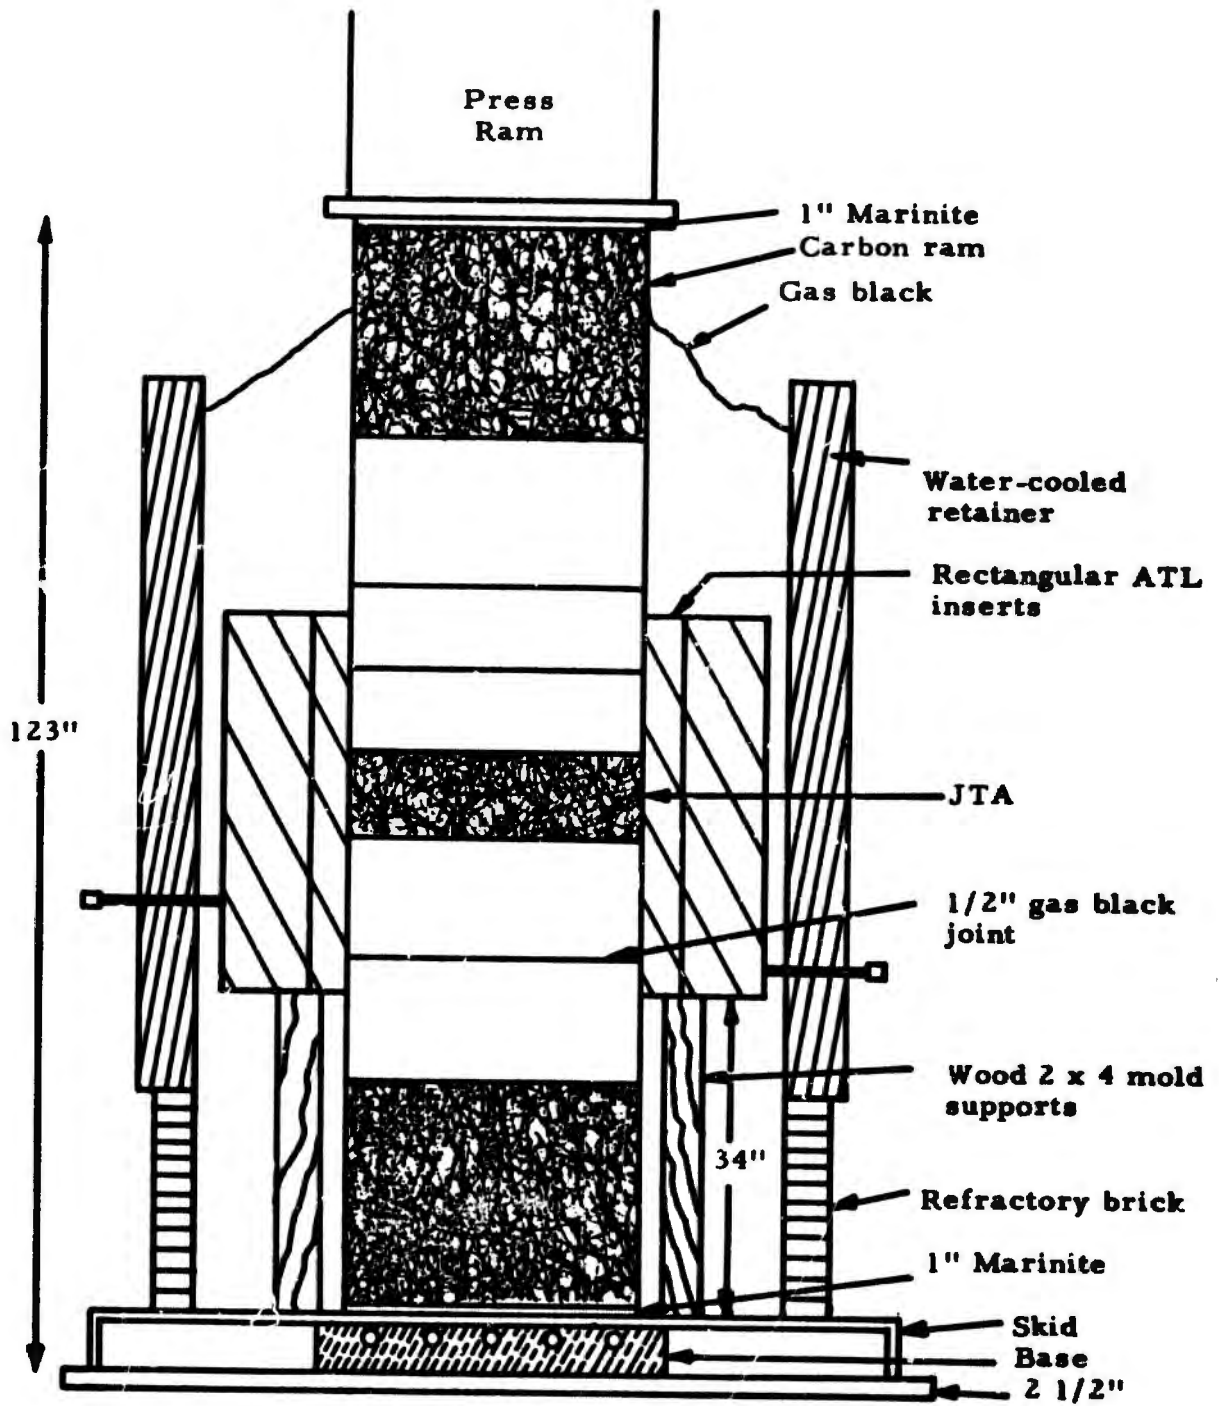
JTA 30-in. by 15-in. by 3-in. Component Assembly.
